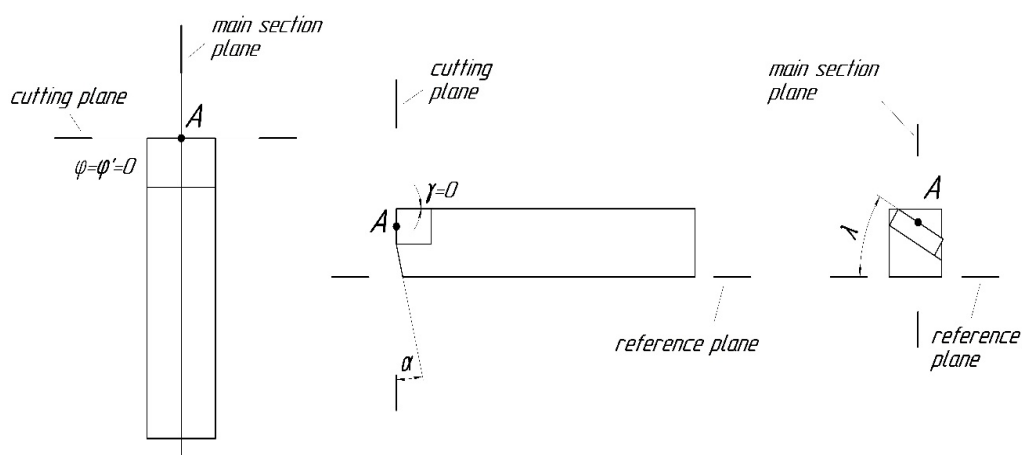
Geometric parameters of the cutting part in the tool coordinate system
